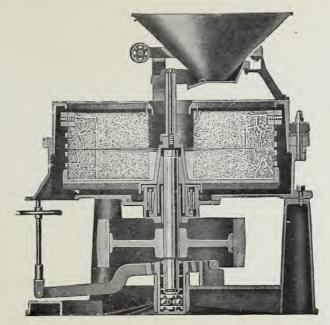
Section of Sturtevant Rock Emery and Burrstone Mill.
